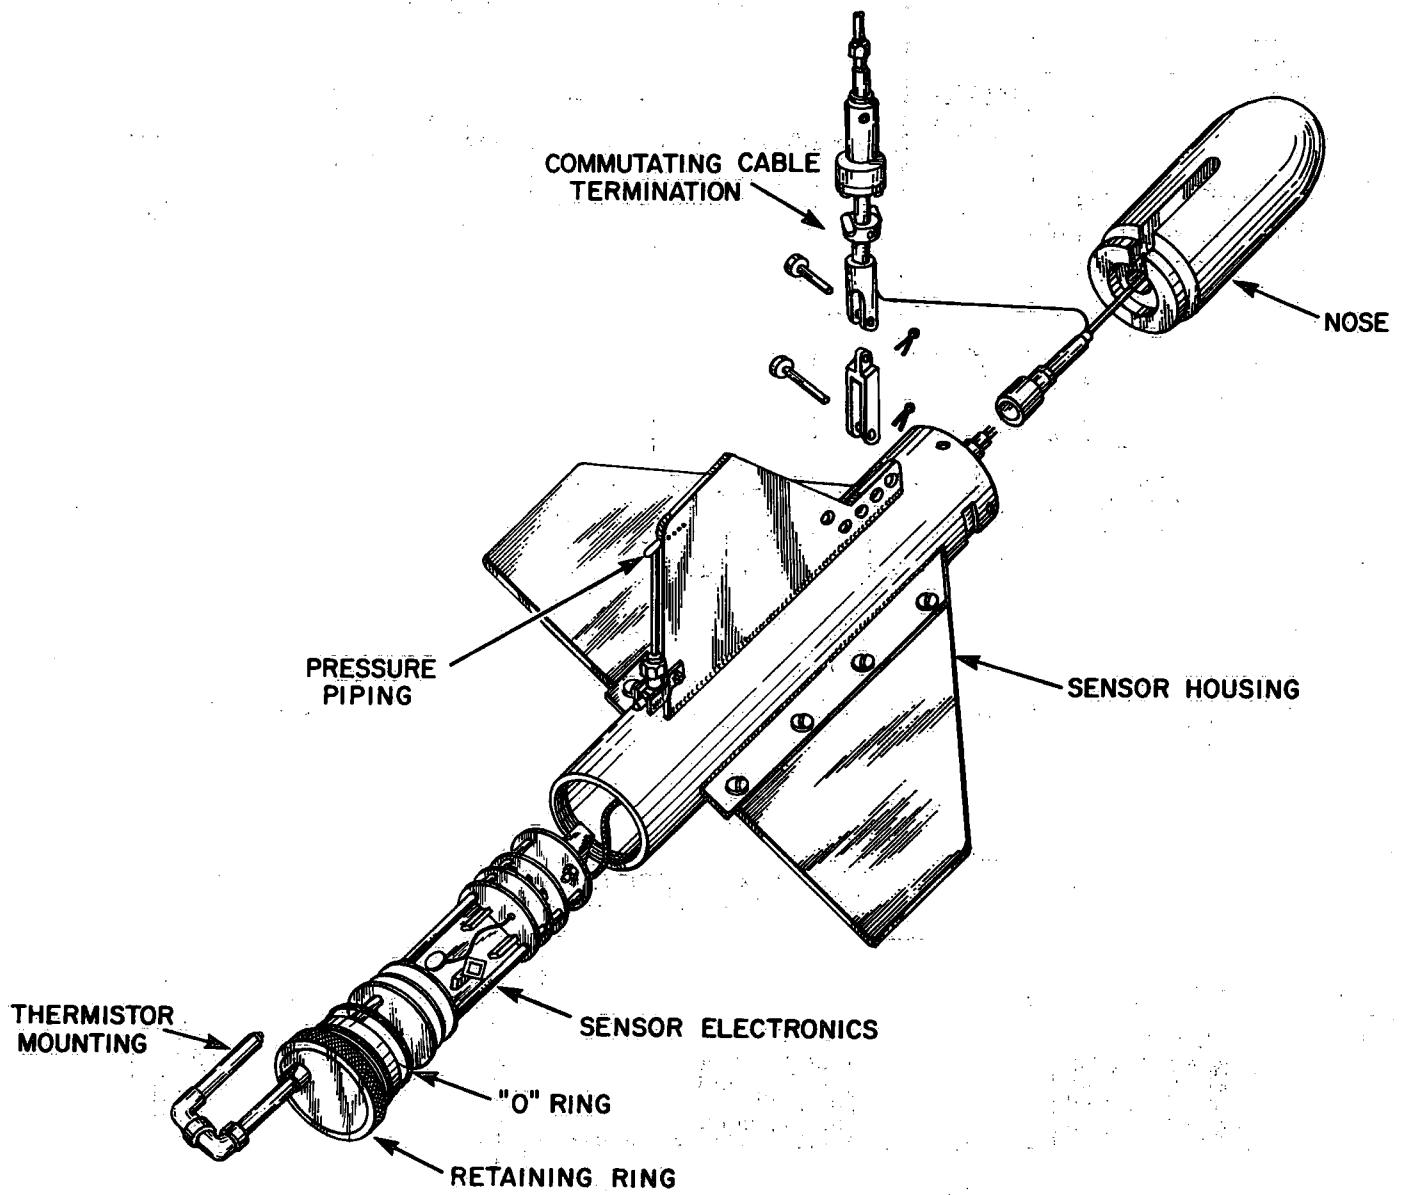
Exploded view of the sensor housing, contents, and attachment (1/6 full size).
